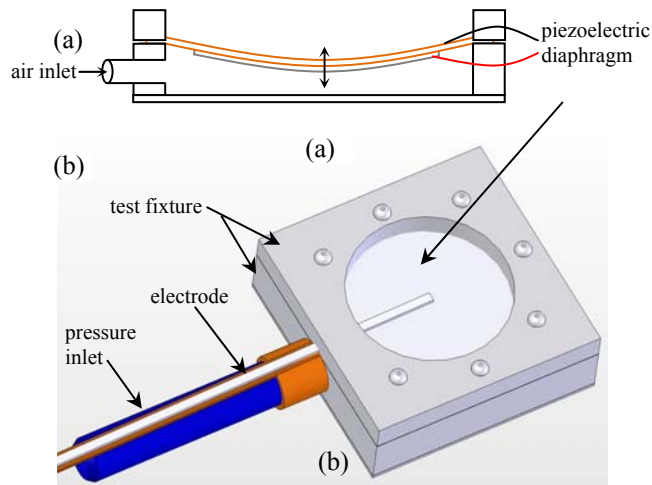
Pressure cavity with diaphragm a) Cutaway schematic and (b) assembly
